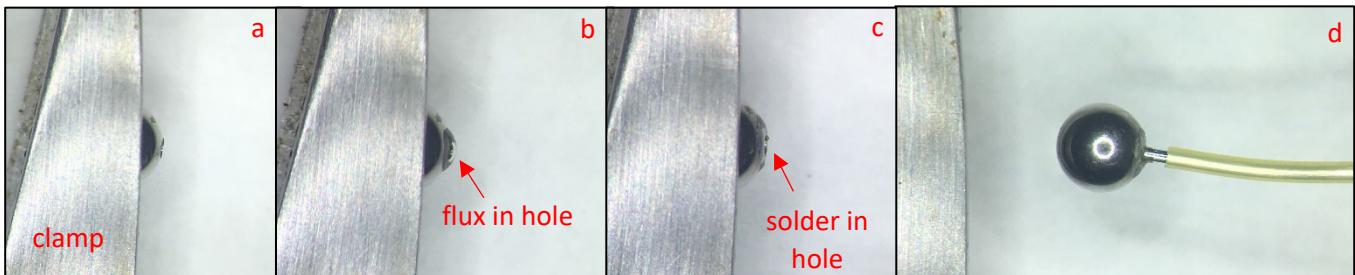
Steps for connecting a wire lead to the ball electrode: a) clamp the ball in place with hole accessible b) add a dab of flux onto the hole in the ball c) melt solder into the hole in the ball d) remelt solder and insert wire
